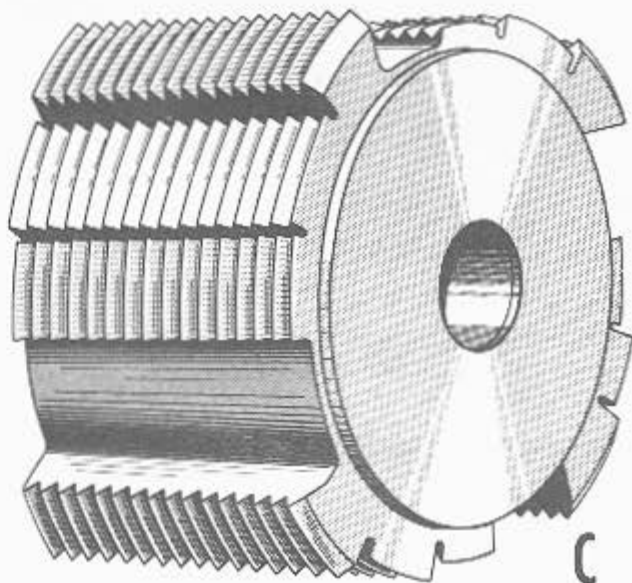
B10.—C. Stepped-thread plug (Welin type).
